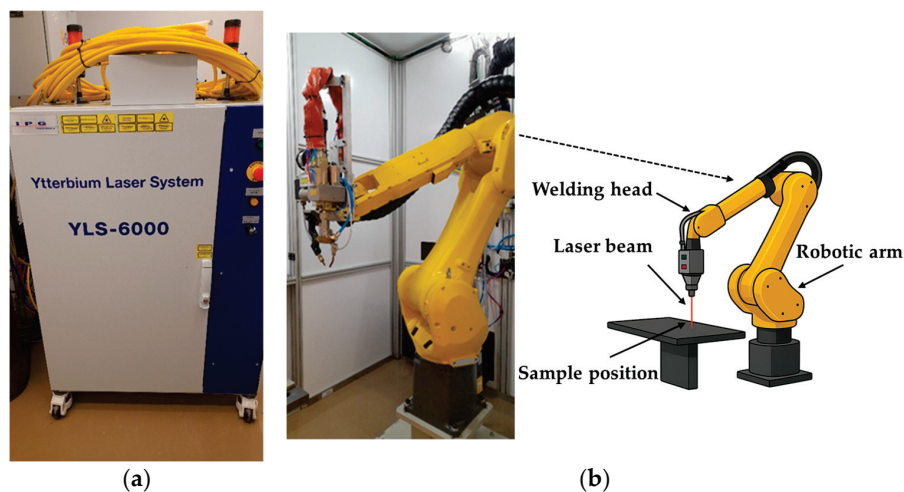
Experimental setup of the laser welding system: (a) laser source (IPG YLS-6000: Ytterbium Laser), (b) laser welding head and components.
